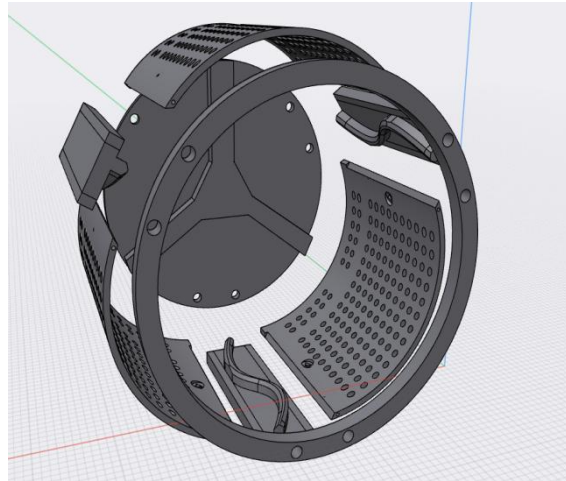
Schematic Diagram of the Drum Parts of the Removable Washing Machine
